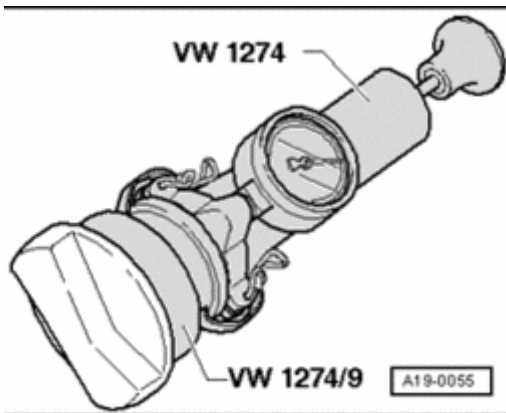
Checking Pressure Relief Valve In Filler Cap
